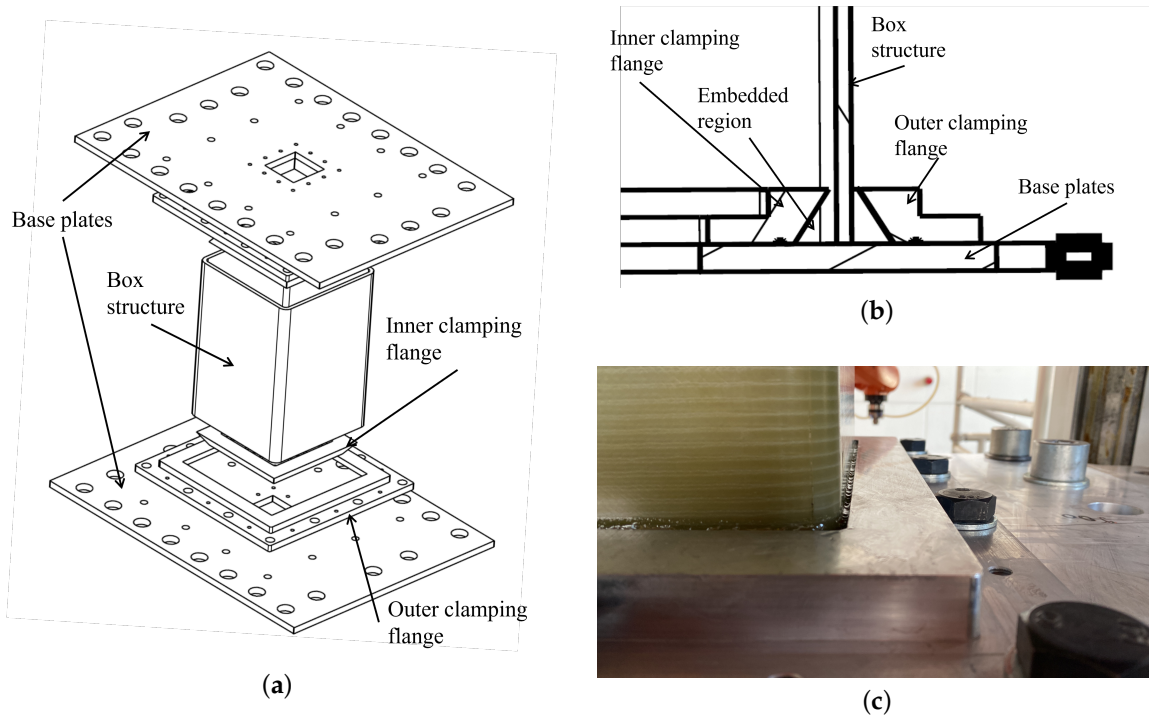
Fixture design for the MPT-based fatigue testing of box structures under multi-axial loading. (a) Exploded view of the MPT fixture setup, showing box structure and load introduction elements. (b) Detailed view in the area of the embedded region. (c) Photograph of the embedded box structure in the lower fixture.
